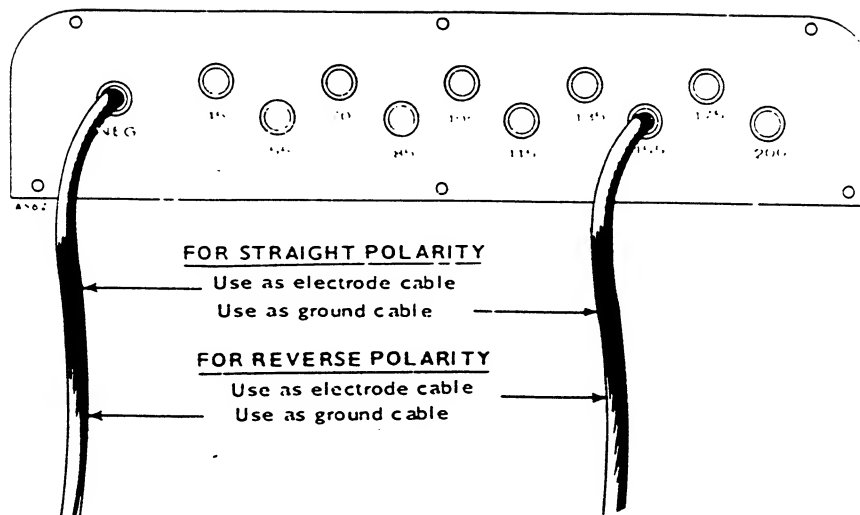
MAIN CURRENT WELDING JACK RECEPTACLES
